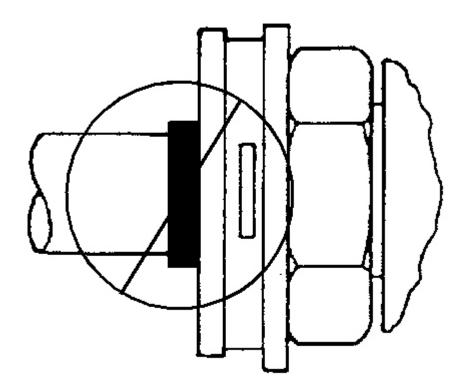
Identifying Improper Joint Seating Courtesy of GENERAL MOTORS CORP.
